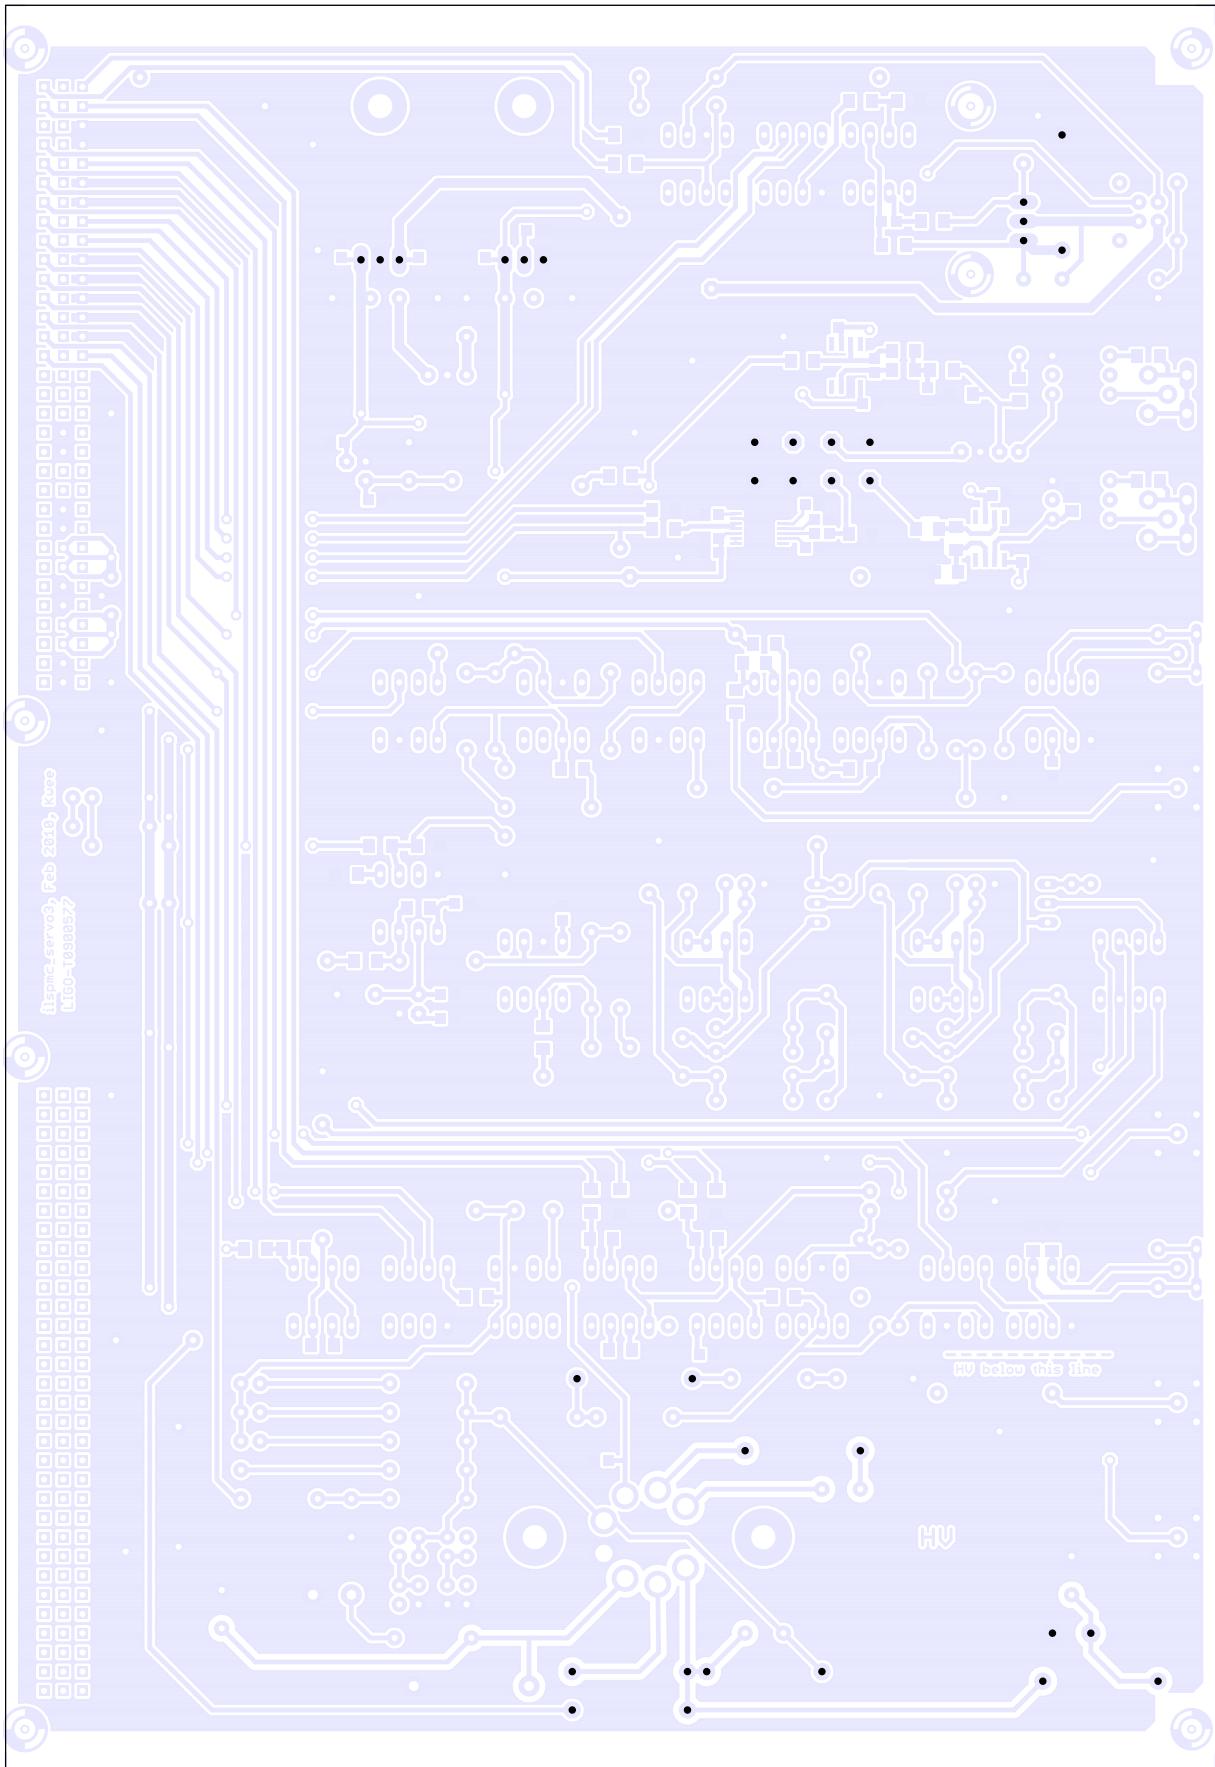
Board bottom view showing drills with 1.0 mm (0.039 in) diameter
